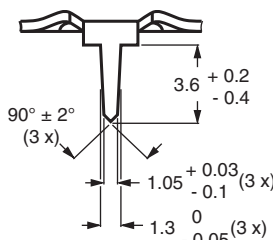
Mounting hole diagram and outline. Form MR: with mounting ring and pins
